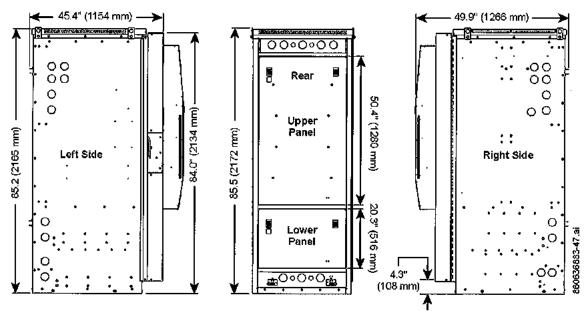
External Left Side, Rear, and Right Side Views, 760237152
